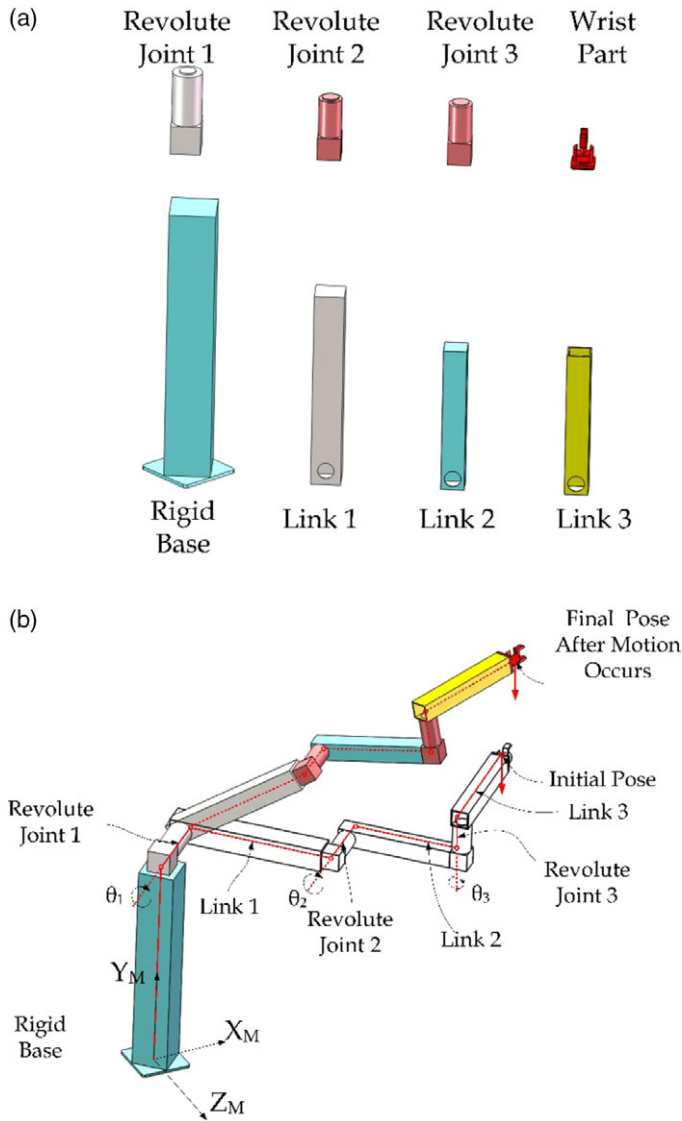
(a) Joint and link modules, (b) assembled MRR.
